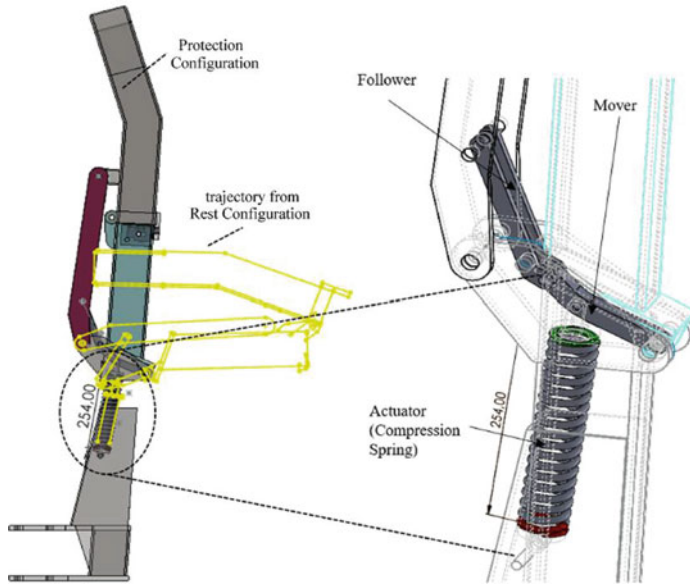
The actuator system, consisting of a spring and two more connecting elements
